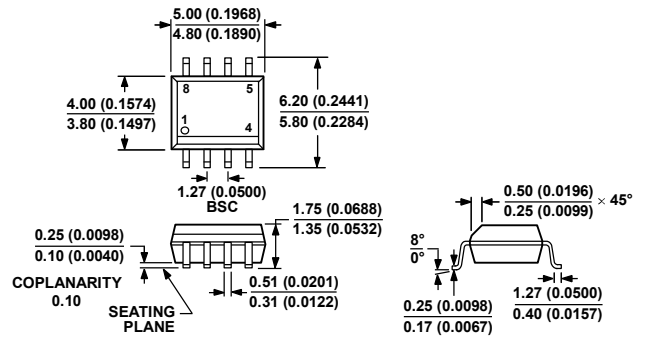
8-Lead Standard Small Outline Package [SOIC\_N] Narrow Body (R-8)
